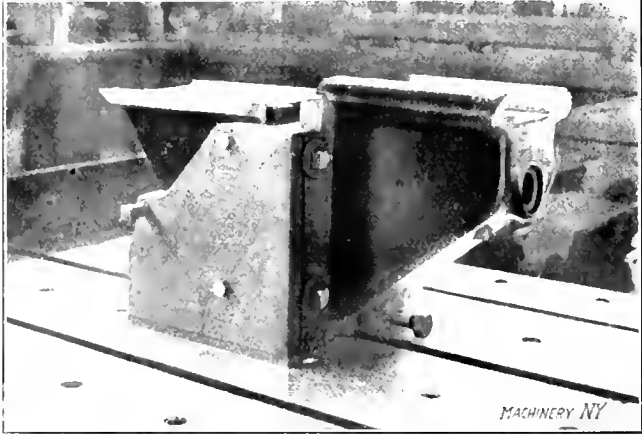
Combination Fixture for Holding Grinder Knees while planing Male and Female Dove-tail Shdes
